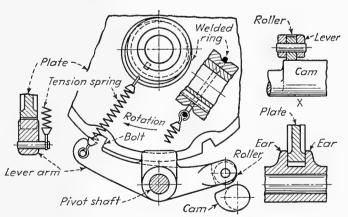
Bolt integral with lever arm has ears directly above the pivot shaft fitting on either side of the plate. As the plate reciprocates, it pulls the bolt along with it. Cam contacts roller, the cam being long enough at X to accommodate the required travel of plate and bolt. The welded ring fits in groove in hub of plate and is connected to tension spring, the other end of which engages a pin in lever.
